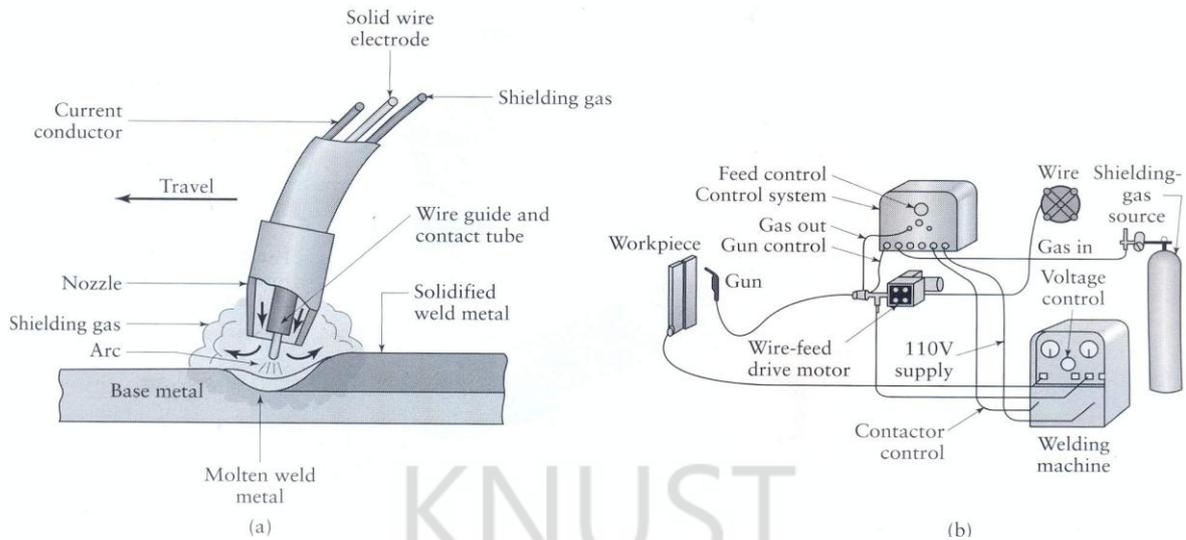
(a) Gas metal welding process (b) Basic equipment used in gas metal-arc-welding operations. (Kalpakjian and Schmid, 2008)
